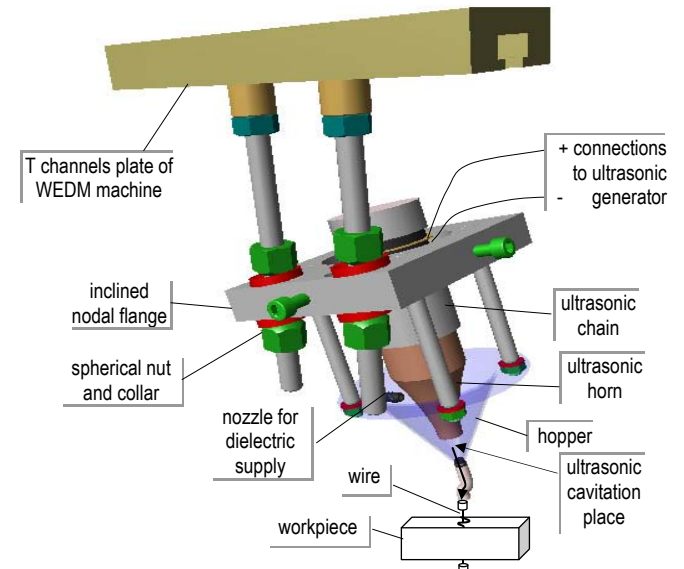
Device for ultrasonic aiding of wire electrical discharge machining
